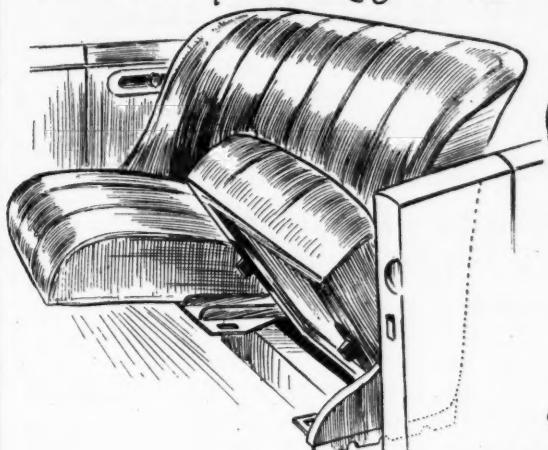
Seat arrangement on Riley car showing wing nut locking device.
